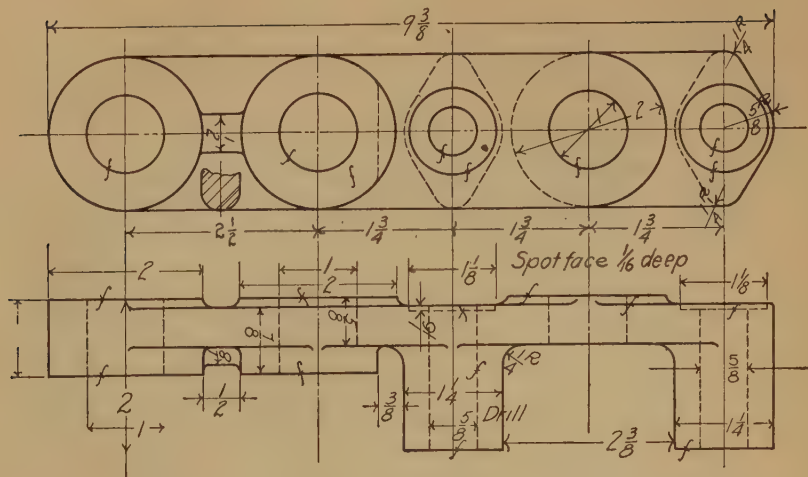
An incorrect drawing to be checked for errors (gear shifter bracket).
